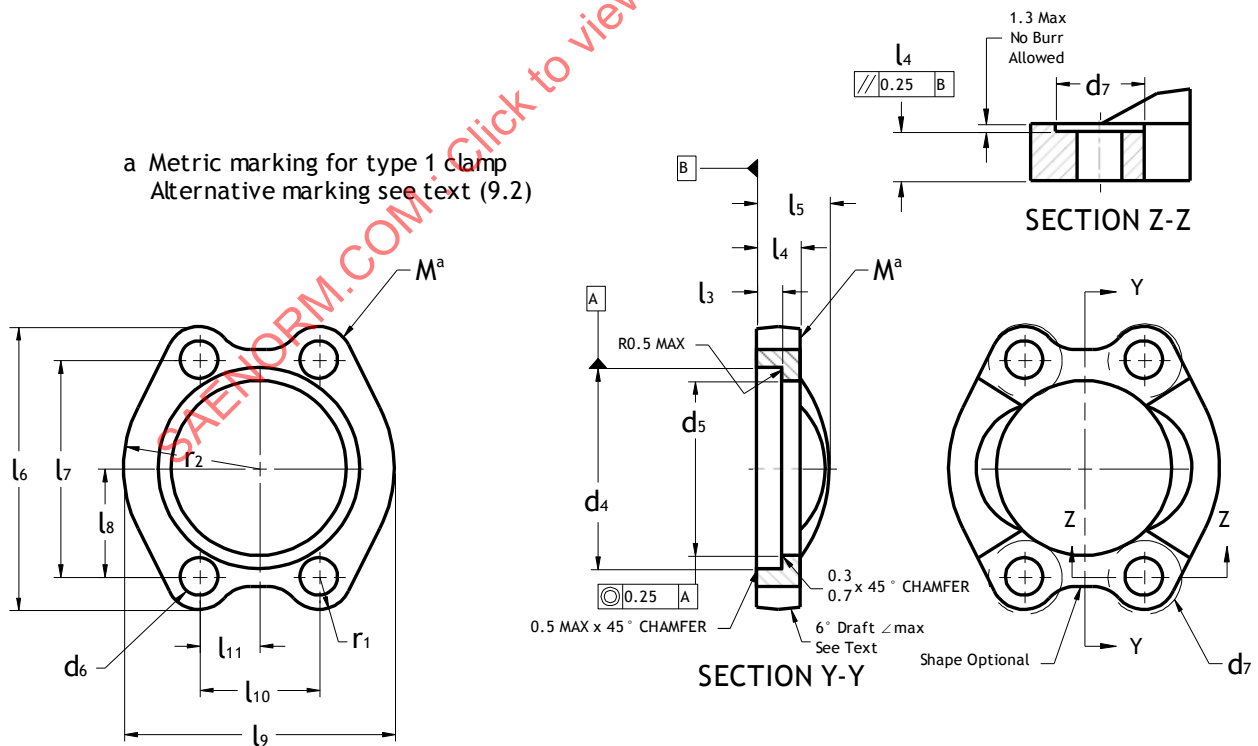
B - FLANGE CLAMP (FC & FCM)
